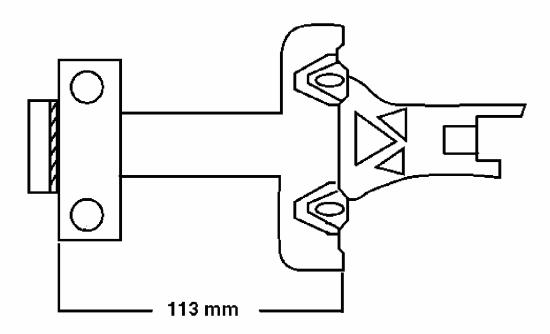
Inspecting Jacket Assembly Collapse Courtesy of GENERAL MOTORS CORP.
